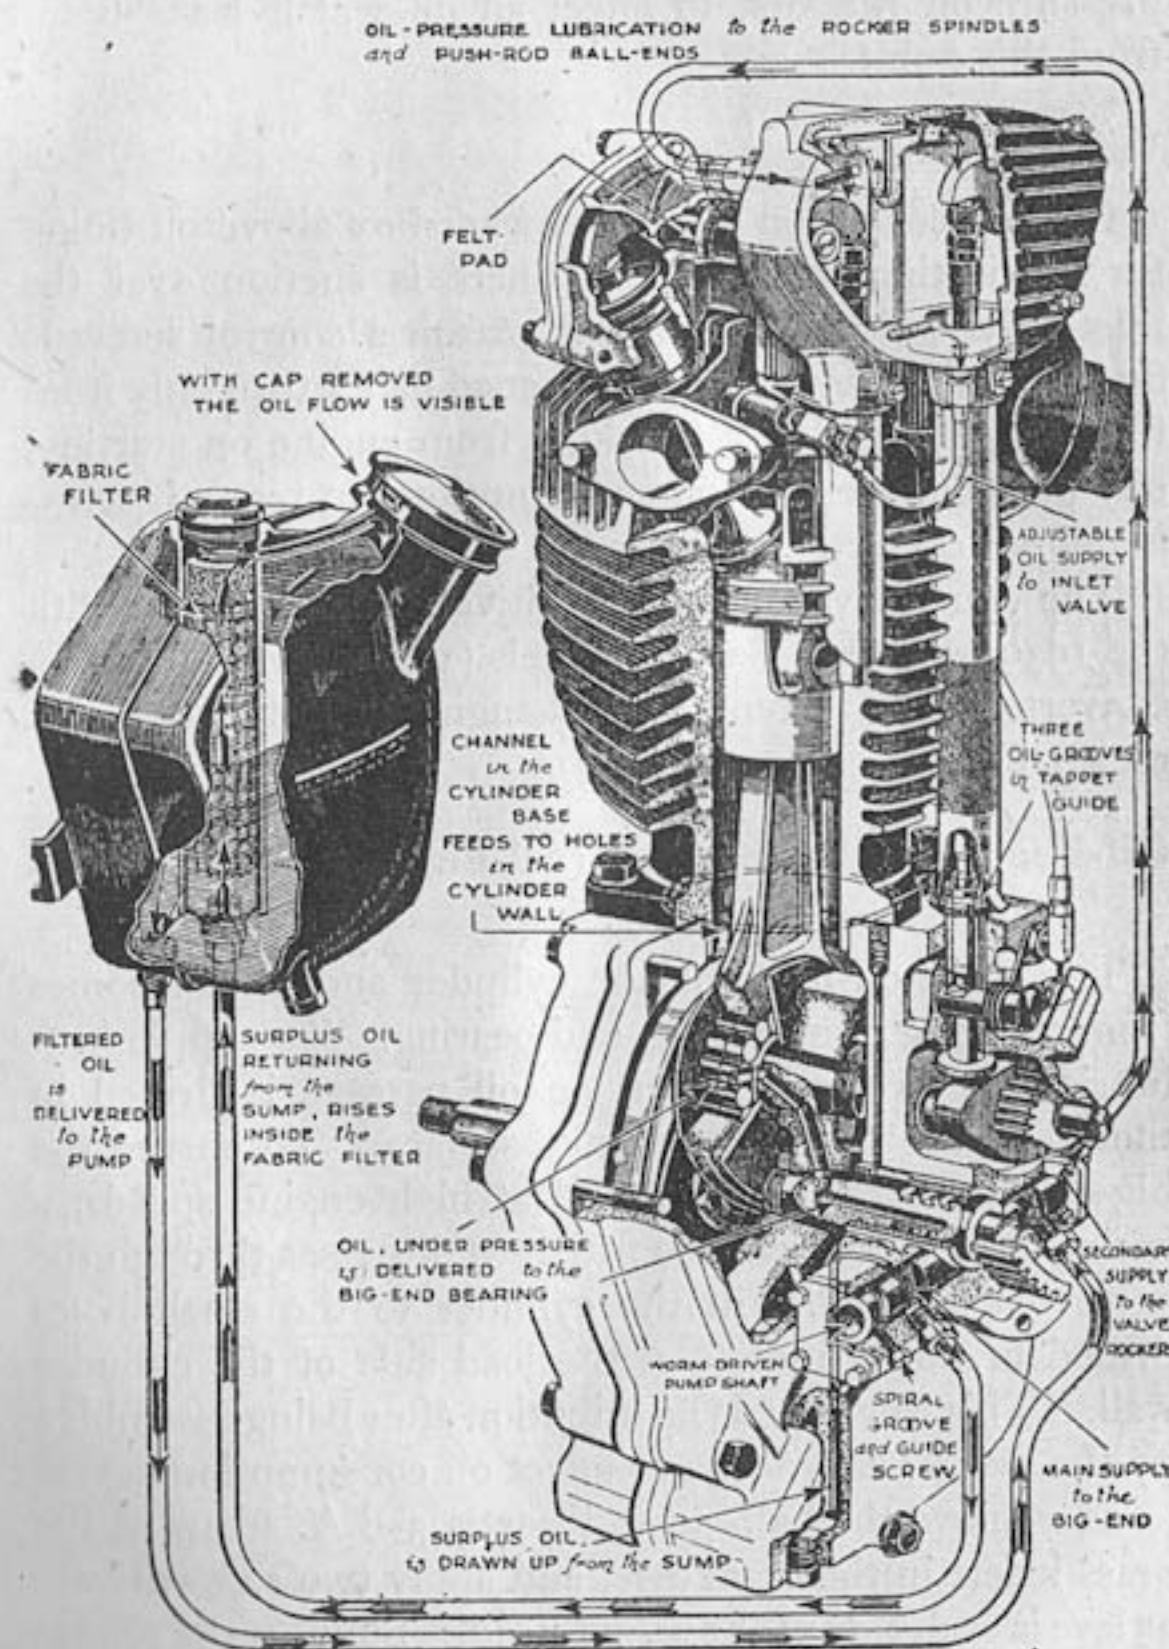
ENGINE LUBRICATION SYSTEM WITH DIRECT OIL-FEED FROM PUMP TO ROCKER-GEAR.
